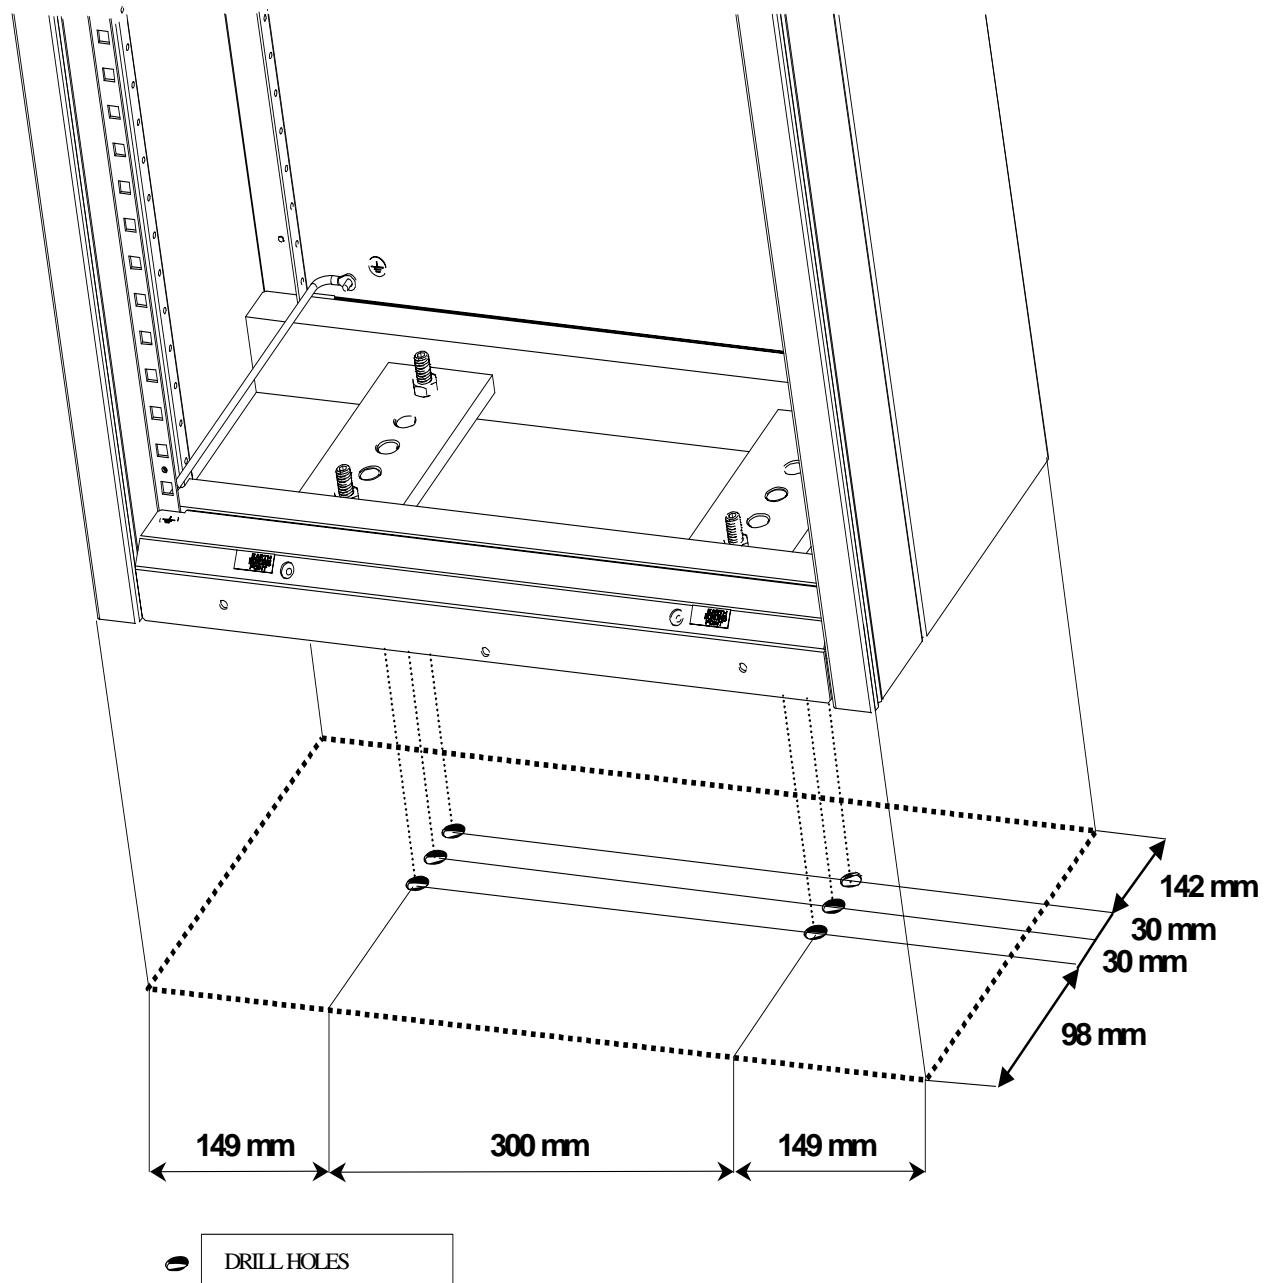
rack - Drill Holes for Anchoring to the Floor (single rack)
